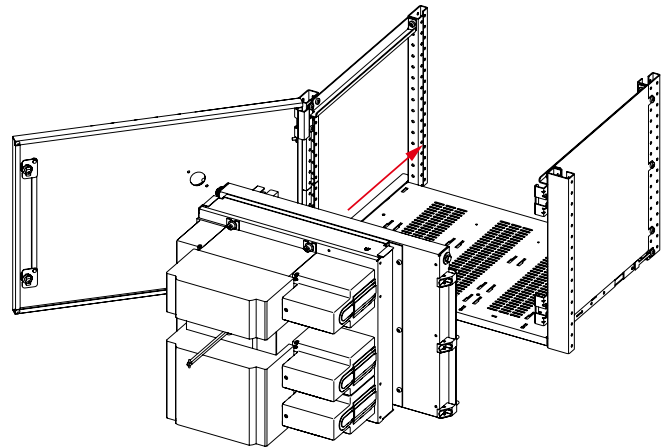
Module location guides and rails for larger modules. Larger modules can be equipped with location guides fixed to the top of the base plate. Guide rails are then mounted in the section.
